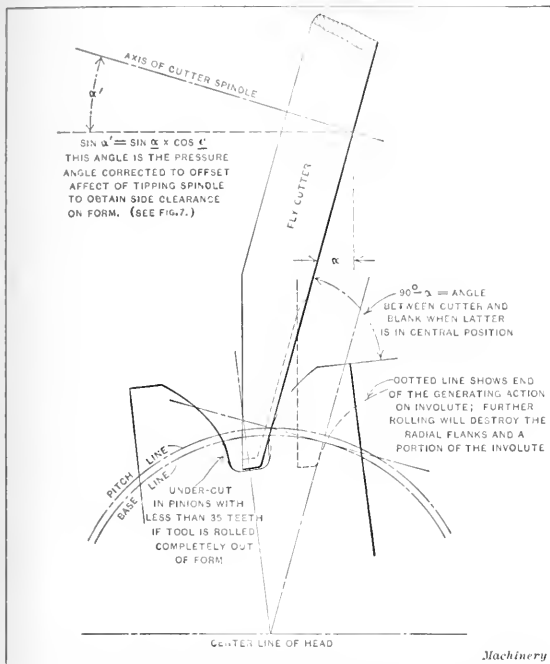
Second Method of setting Milling Machine to generate Forming Tool for Gear Cutters with a Straight Fly Cutter
